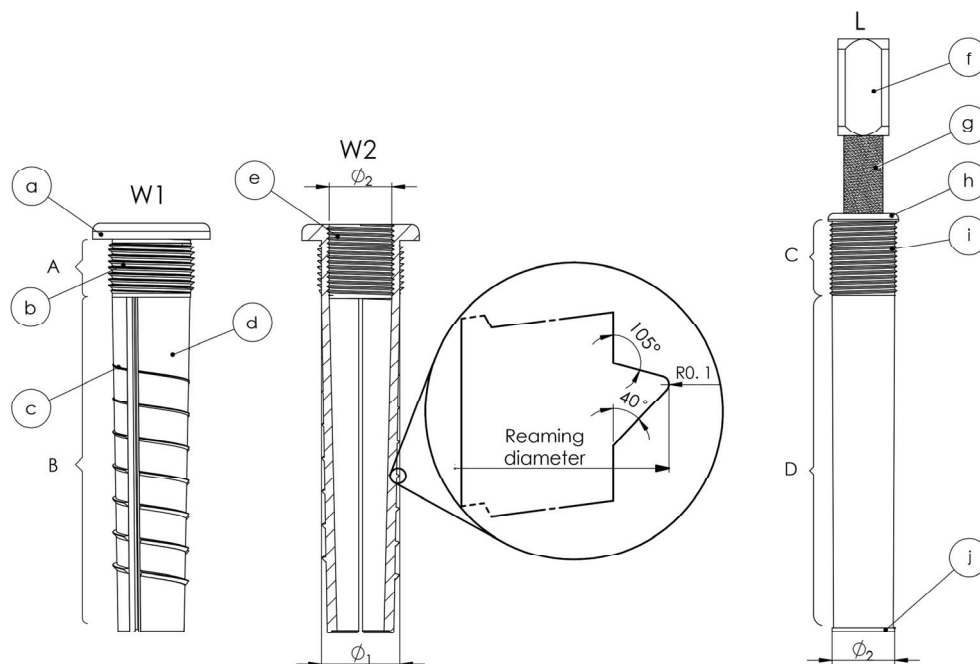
The LPOFSs structure: W1 – the fixture (view): (A) cylindrical segment A; (B) conical, triple notched segment B; (a) blocking cap; (b) the implant thread for cortical bone; (c) helically cut teeth with an outer diameter equal to the outer diameter (ϕ_1) of segment A (bottom of the thread's notches); (d) Ti-coating; W2 – the fixture (cross-section): (e) metric thread for attaching the abutment; L – abutment (view): (C) cylindrical segment C; (D) conical segment D; (f) head; (g) head's shaft with a porous layer; (h) abutment's blocking cap; (i) metric thread for fixture attachment; (j) closure cap
